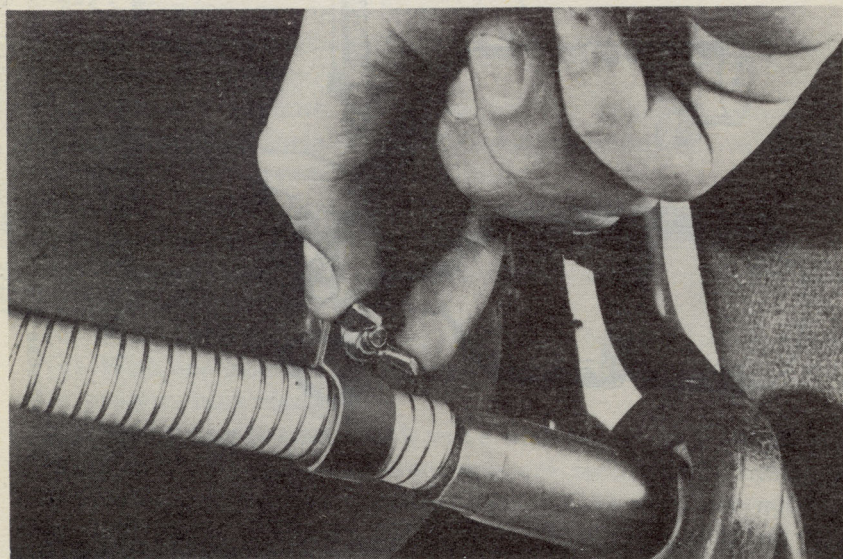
(Added.) Removing wing nut to free valve flexible shaft.
